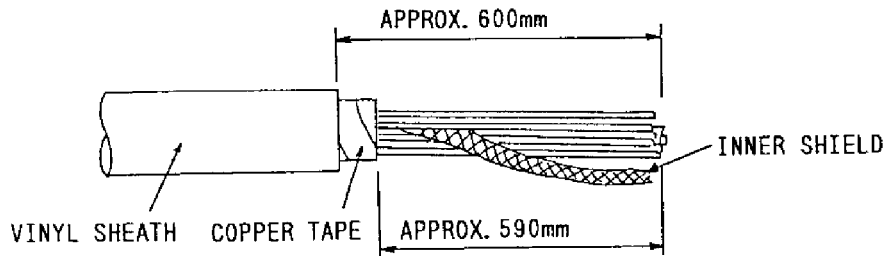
Fabricating the Signal Cable RW-3839-2
